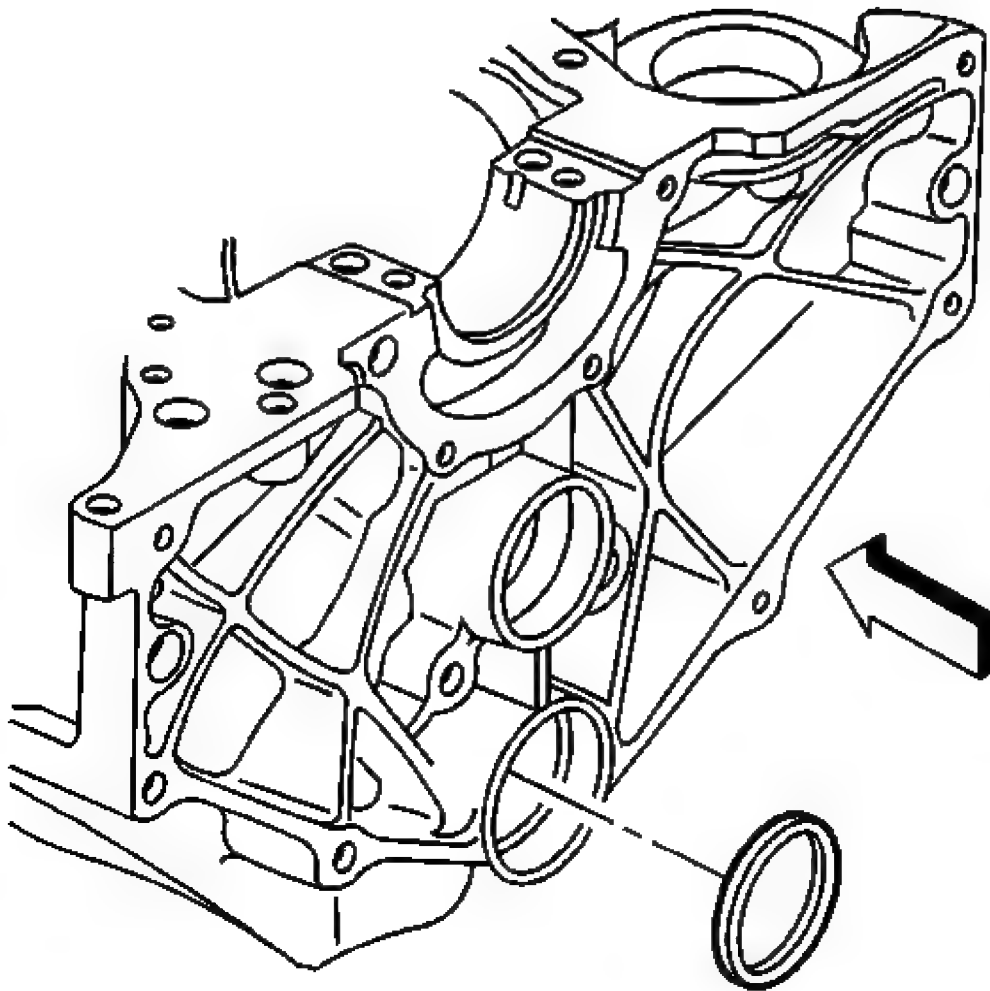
Locating Expansion Cup Plug For Balance Shaft Rear Bearing Hole
